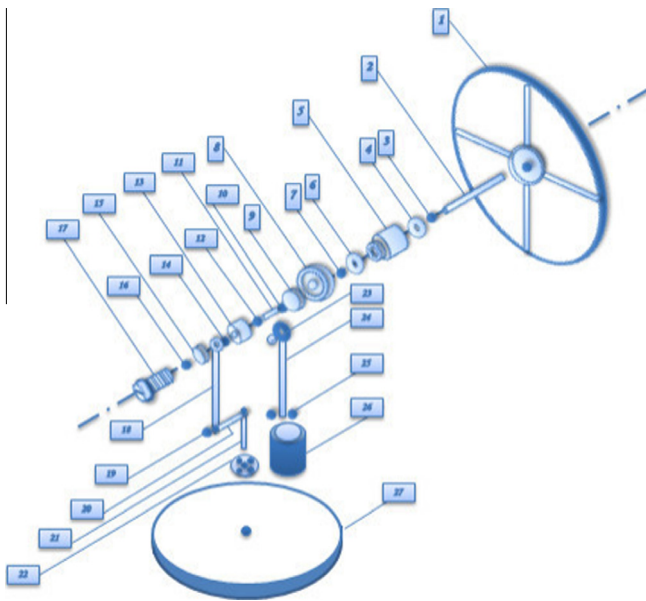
Stirling engine (rotating part components) design. 1. Flywheel, 2. Crankshaft, 3. Shim, 4. Ball Bearing, 5. Bearing Bush, 6. Ball Bearing, 7. Shim, 8. Crank Disc, 9. Socket, 10. Shim, 11. Crank Pin, 12. Shim, 13. Crank Disc, 14. Shim, 15. Ball Bearing, 16. Shim, 17. Head Screw, 18. Connecting Rod, Short, 19. Adjusting Collar, 20. Connection Cylinder, 21. Displacer Rod, 22. Displacer Bushing, 23. Ball Bearing, 24. Connecting Rod, Long, 25. Cylinder Pin, 26. Power Piston, 27. Displacer.
